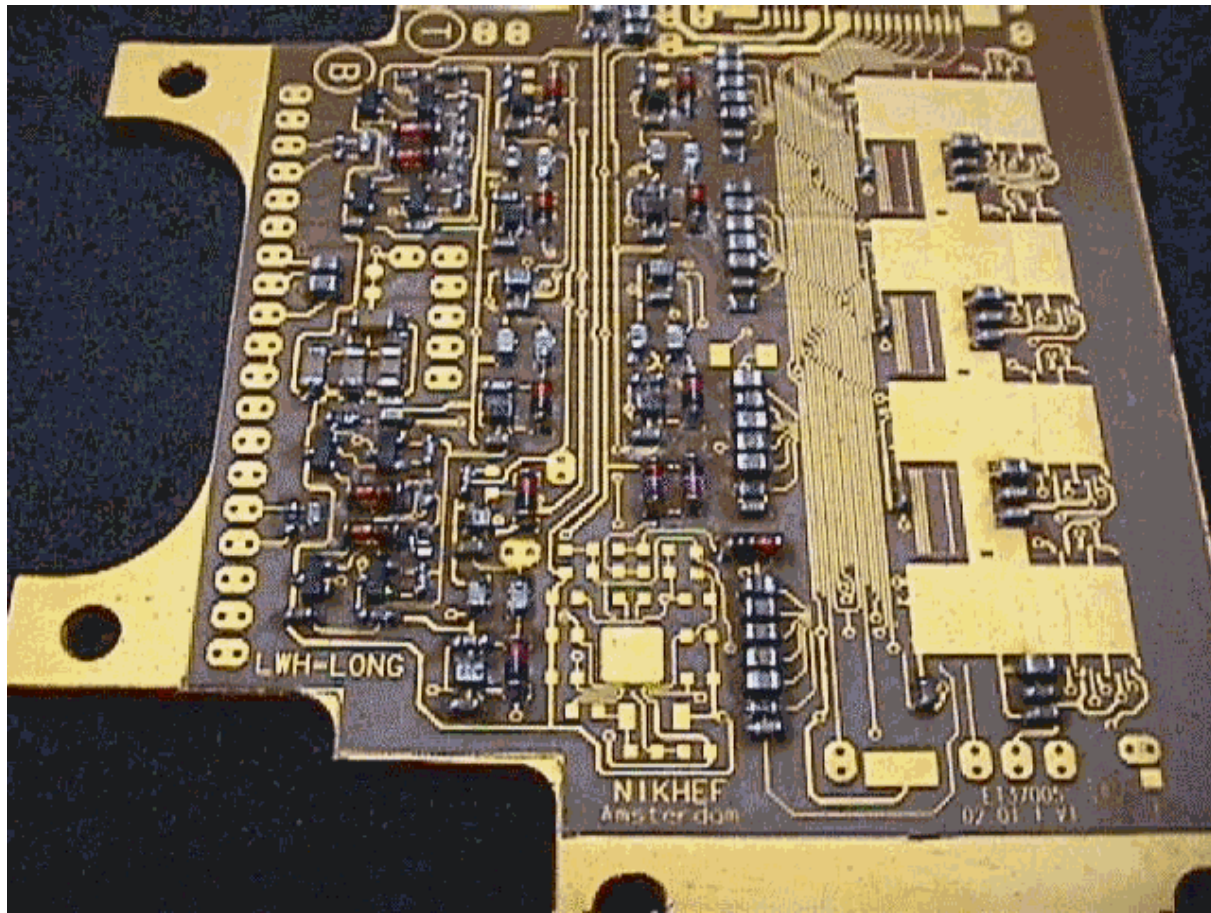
Partly assembled hybrid for HERMES lambda-wheels (6.5x8.5 cm).
